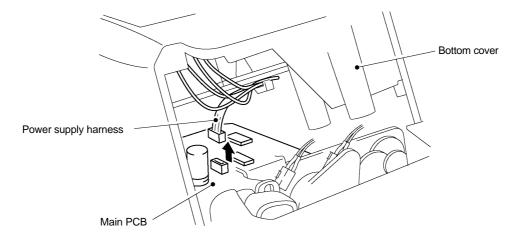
Removing the Power Supply Harness and Connector
